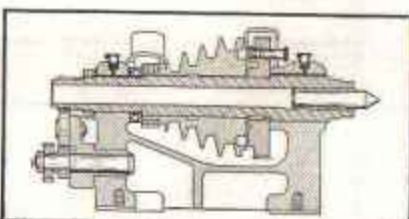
Section of "Workshop" Headstock with 4-Step V-Belt Cone Pulley. For Further Details See Cut Below and Page 7
